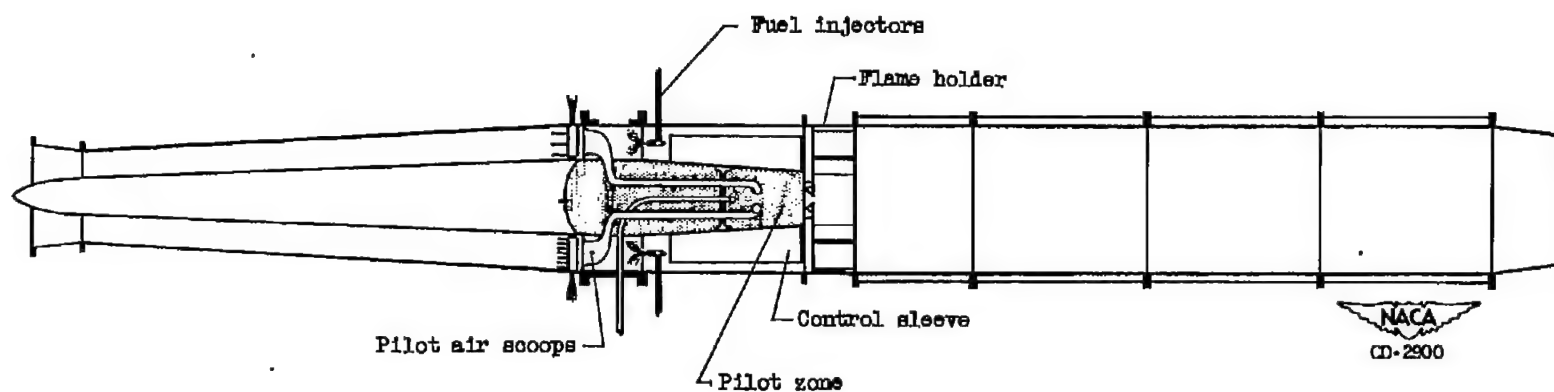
Sketch of 16-inch ram-jet engine showing position of fuel injectors, flame holder, and mixing control sleeve.
